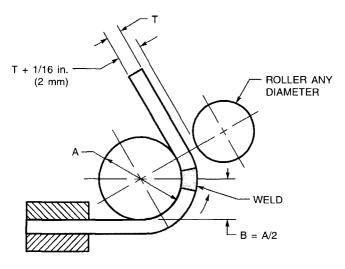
B—Alternative Roller-Equipped Guided Bend Test Jig for Bottom Ejection of Test Specimen
